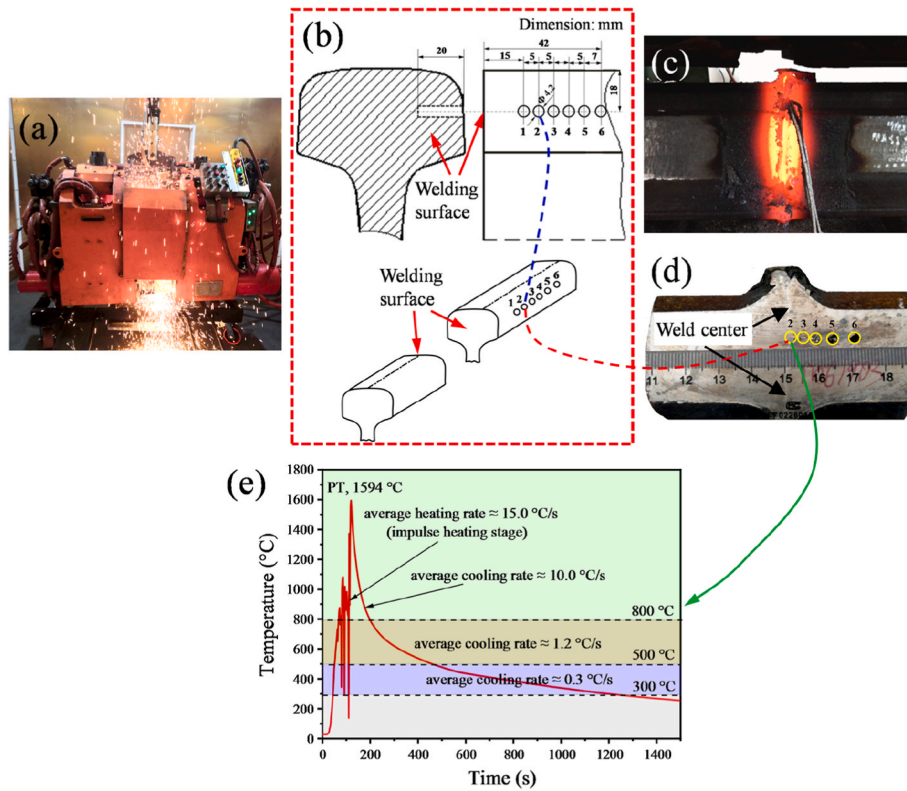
Temperature monitoring of rail welding: (a) CFB rail welding achieved by YHG-1200 mobile flash-butt welder at heat input of 8.3 MJ; (b) layout diagram of thermocouple embedding in the lateral rail head before welding; (c) temperature measurement after rail welding; (d) longitudinal section of rail joint showing the actual position of thermocouples after welding; (e) thermal cycle curve of weld center corresponding to position ‘2’ shown in Fig. 1(b,d).
